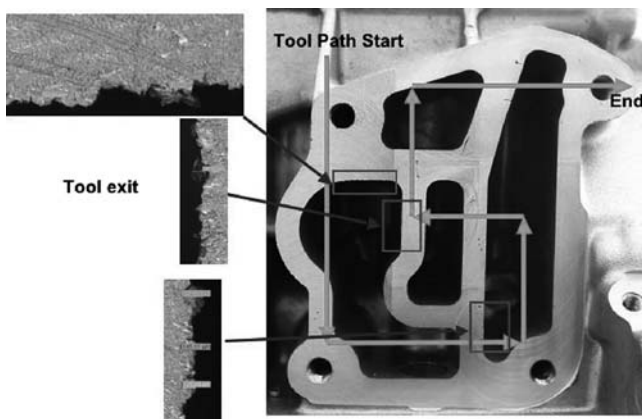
Conventional tool path for face milling engine block face and resulting burrs at key locations
